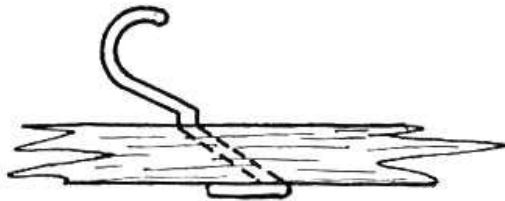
The rear hook for the elastic is made from a piece of wire taken from a large safety-pin and fixed in the mainspar in the manner shown.
